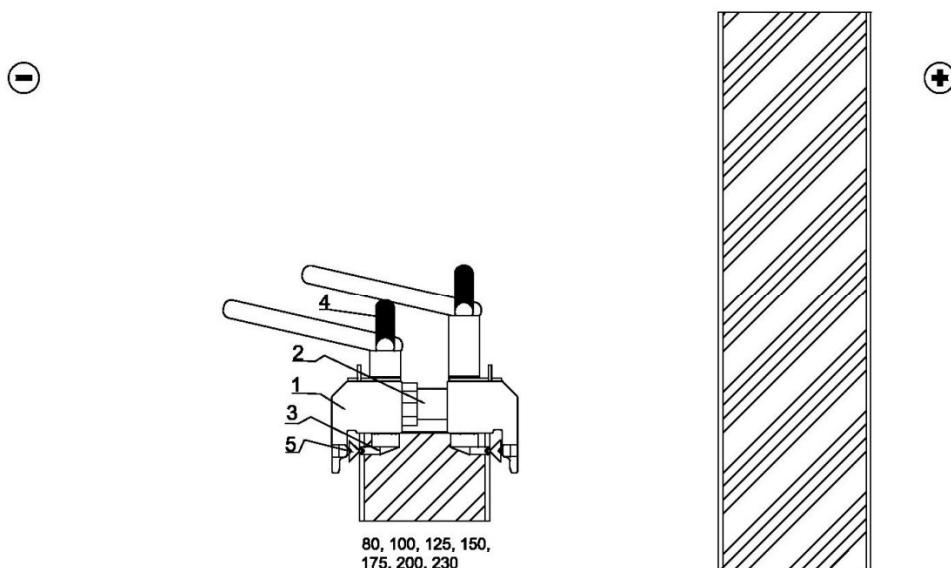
Parts of the lifter: 1. frame, 2. adjusting clamp for the width of the frame, 3. grip plate, 4. fixing lever and 5. stop pin
